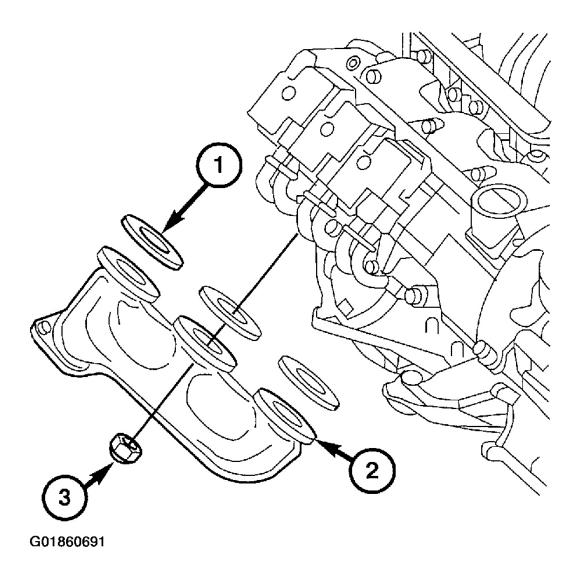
Installing Right Side Exhaust Manifold Courtesy of DAIMLERCHRYSLER CORP.
